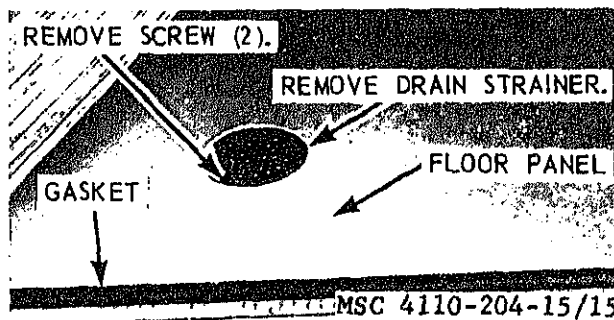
Refrigerator panel and door seals, and clamp assemblies, removal and installation
